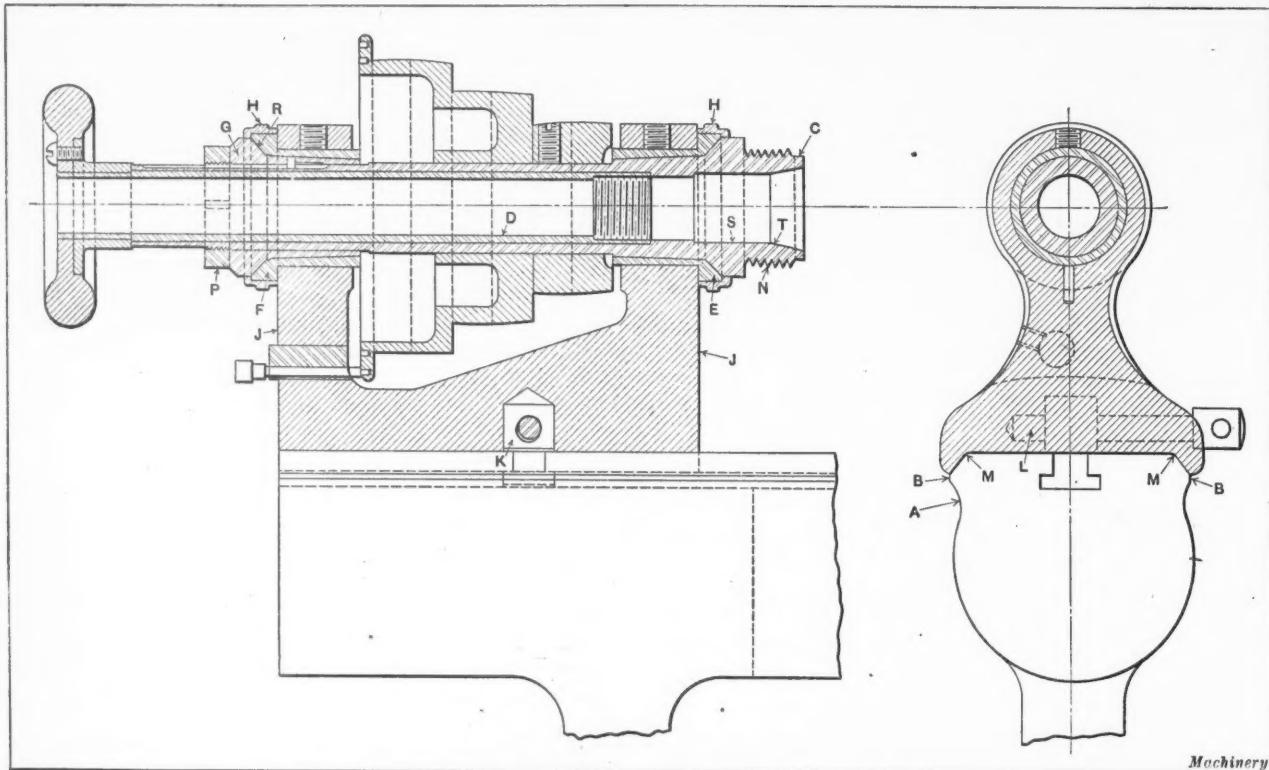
Sectional View of the Assembled Headstock, showing Relation of the Various Parts
